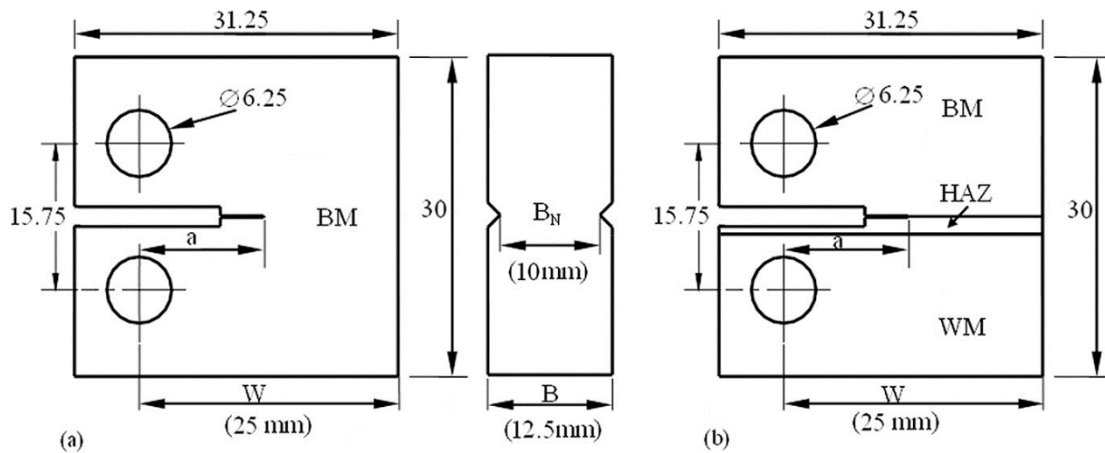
Specifications and dimensions of CT specimens (a) Base metal specimen and side groove (b) Cross weld specimen consist of BM, WM and HAZ
